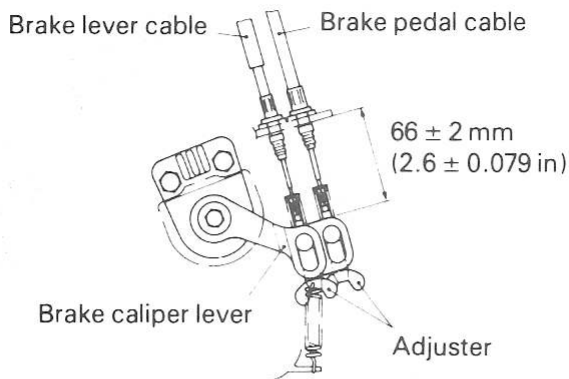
On YT 125/175 K/L/N models, the top of the caliper lever should be the specified distance from the frame tab before beginning the brake adjustment (Sec 23)
